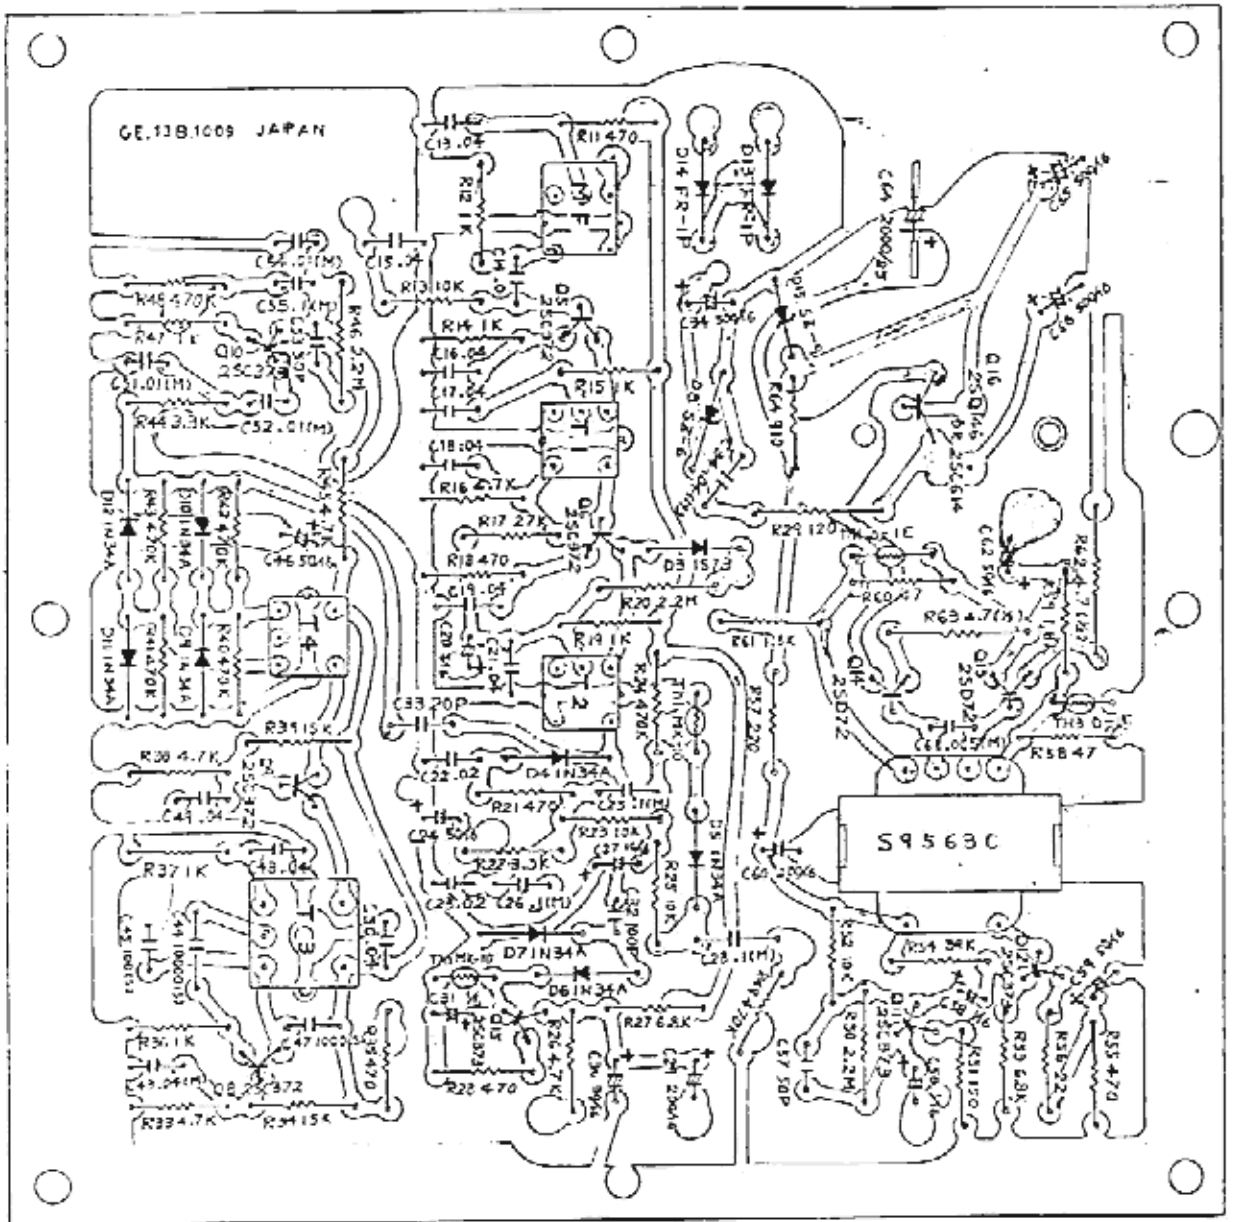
MAIN PRINTED CIRCUIT BOARD REAR VIEW
